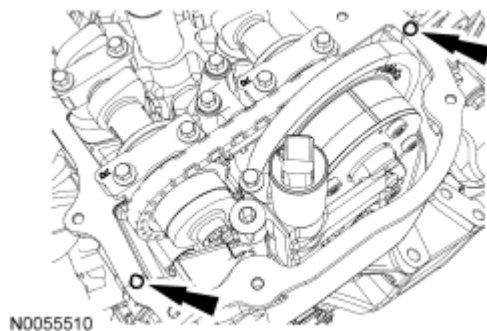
Applying Bead Of Motorcraft High Performance Engine RTV Silicone To Engine Front Cover-To-RH Cylinder Head Joints
